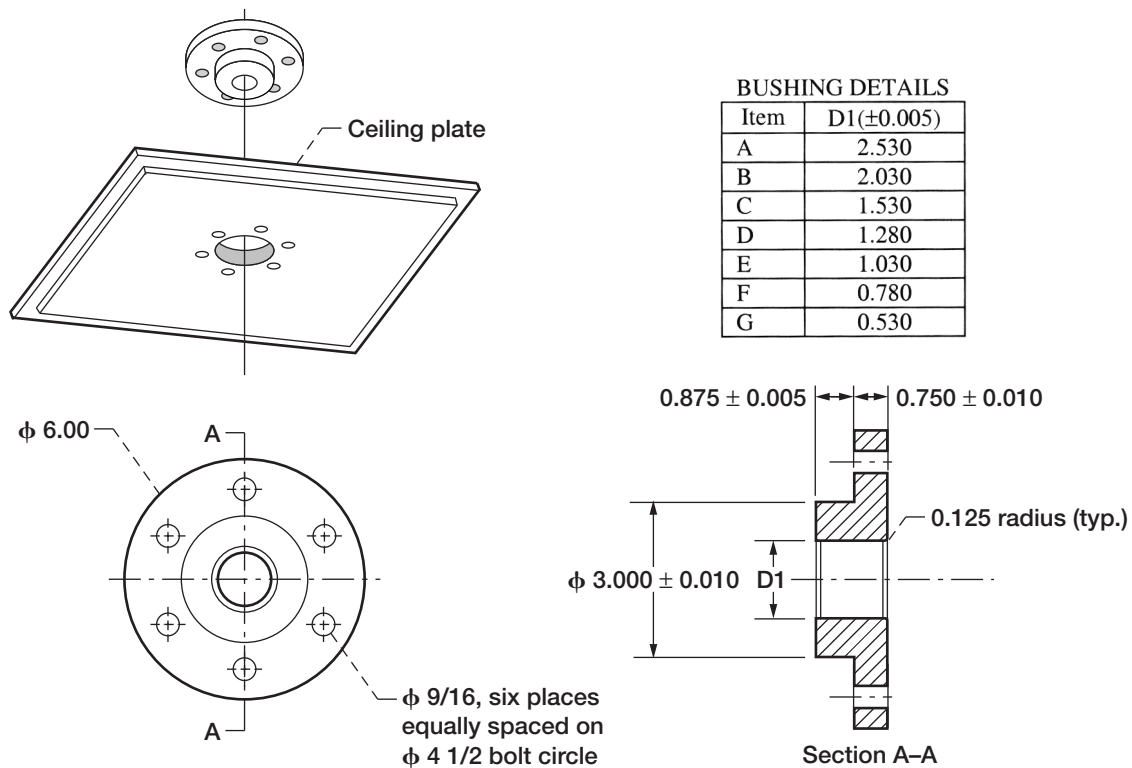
Model support pivot bushing in IRT ceiling. Bushing material is 7075-T6 aluminum. All dimensions are in inches; typ. is typical.
